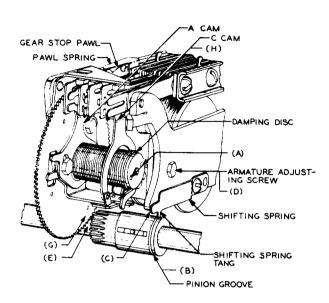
Engagement of Shifting Spring Tang and Pinion
